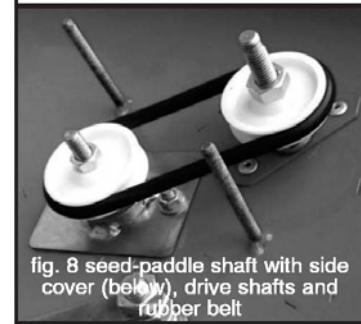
seed-paddle shaft with side cover (below), drive shafts and rubber belt
